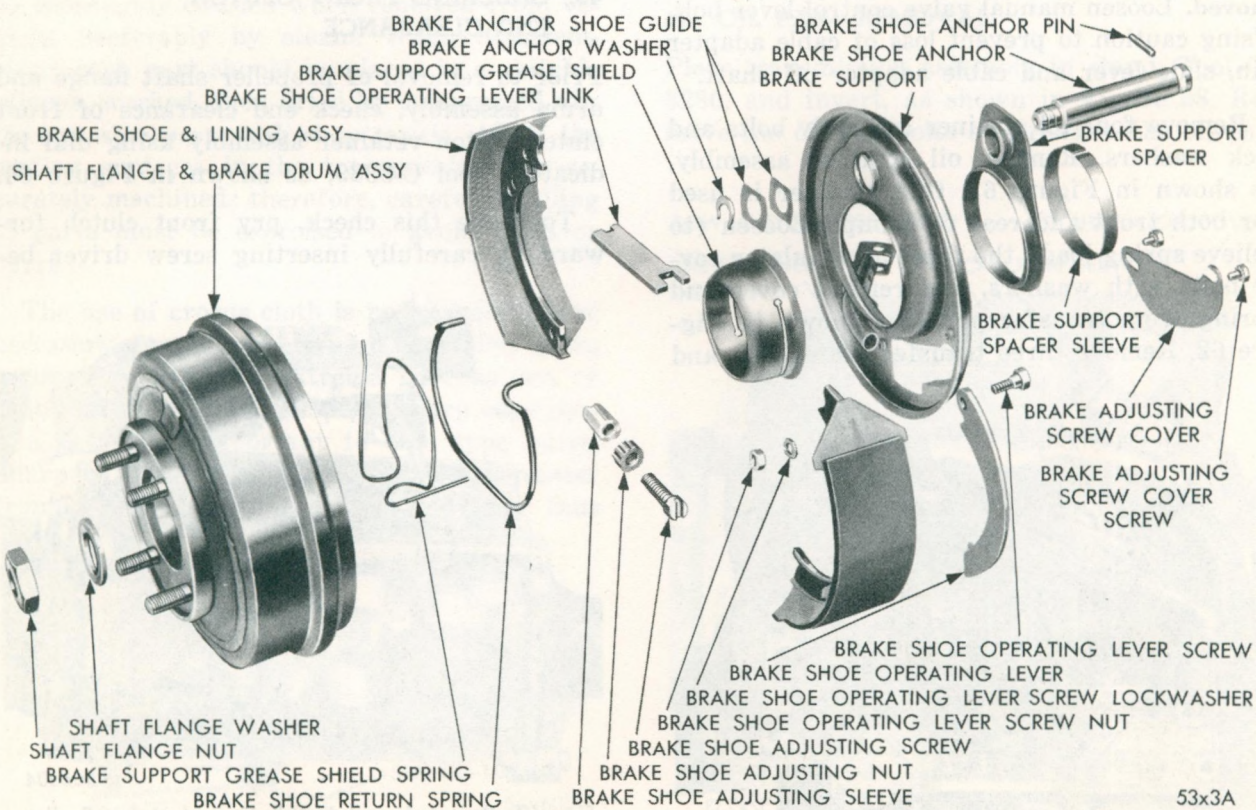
Internal Expanding Hand Brake (Disassembled View)
